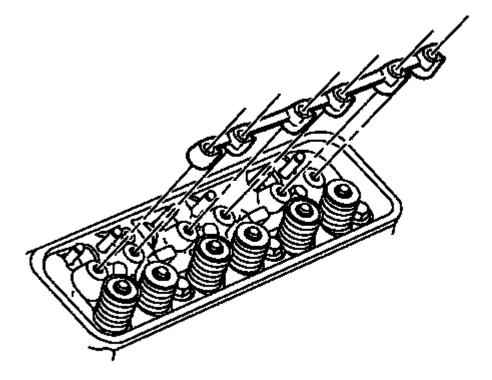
View Of Valve Rocker Arm Supports Courtesy of GENERAL MOTORS CORP.
